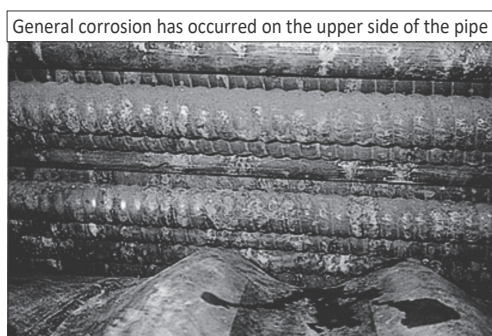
Example of corrosion caused by dissolved oxygen in a shell boiler¹⁾
